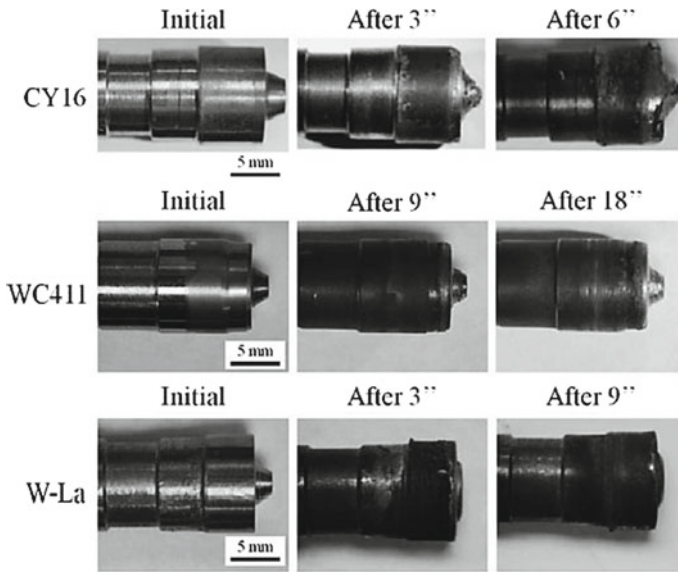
Tool degradations after different welding lengths for three different tools [18]
